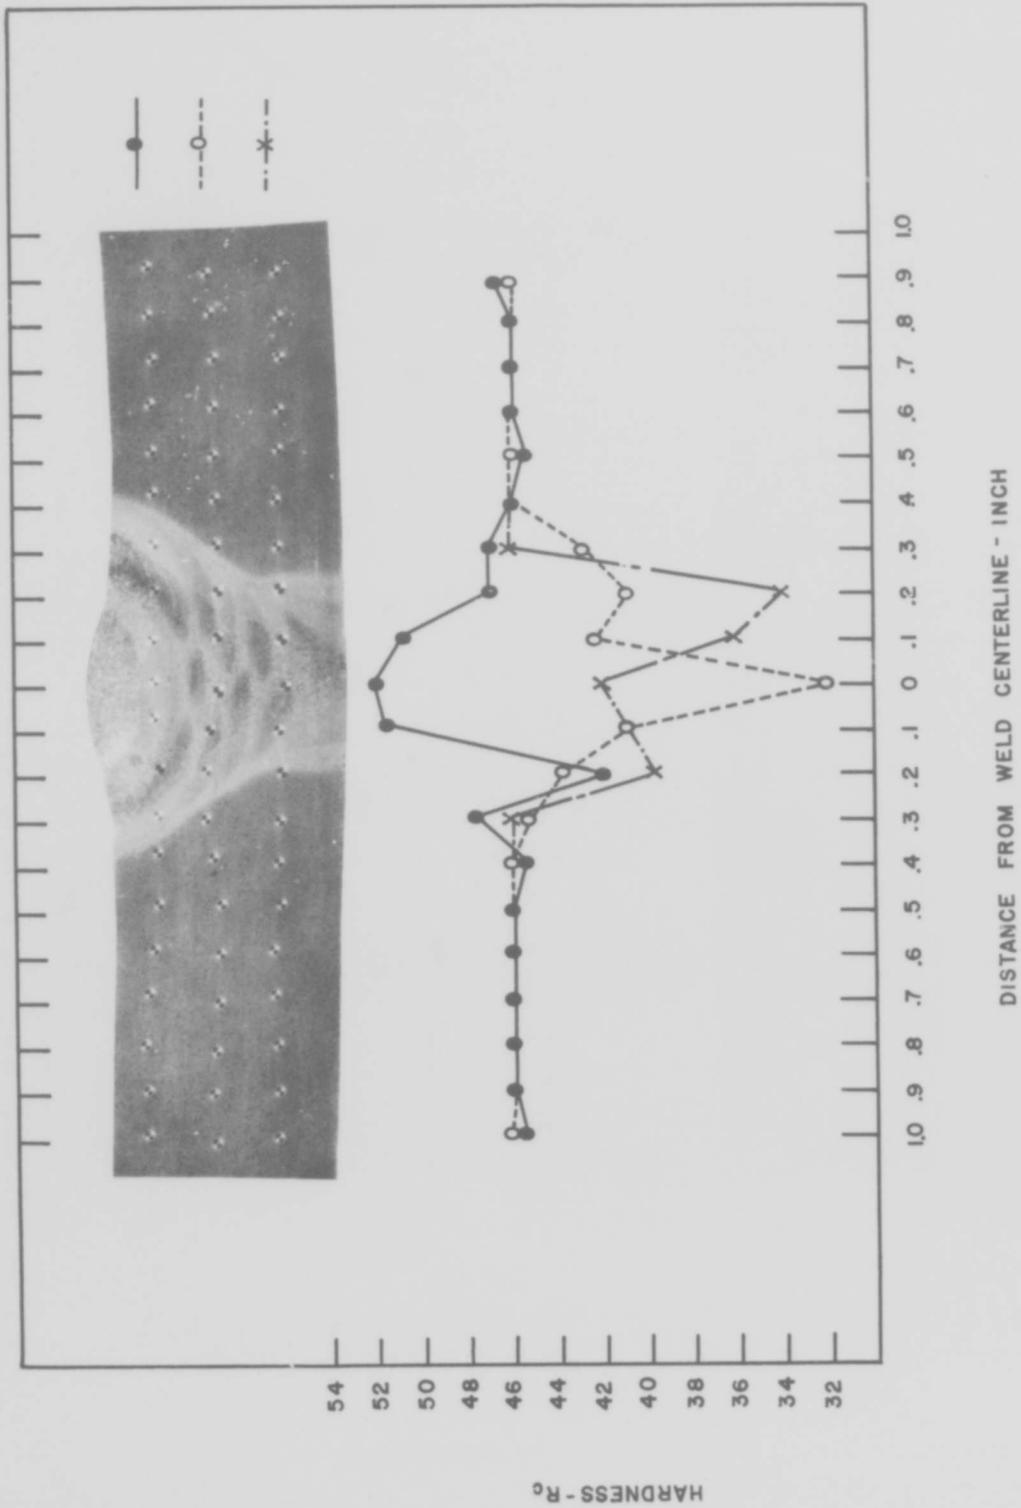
Hardness Survey of TIG Weld No. X246 Made in Vasco Jet Plate at 4 ipm Using Vasco Jet Filler Wire No. 18.
